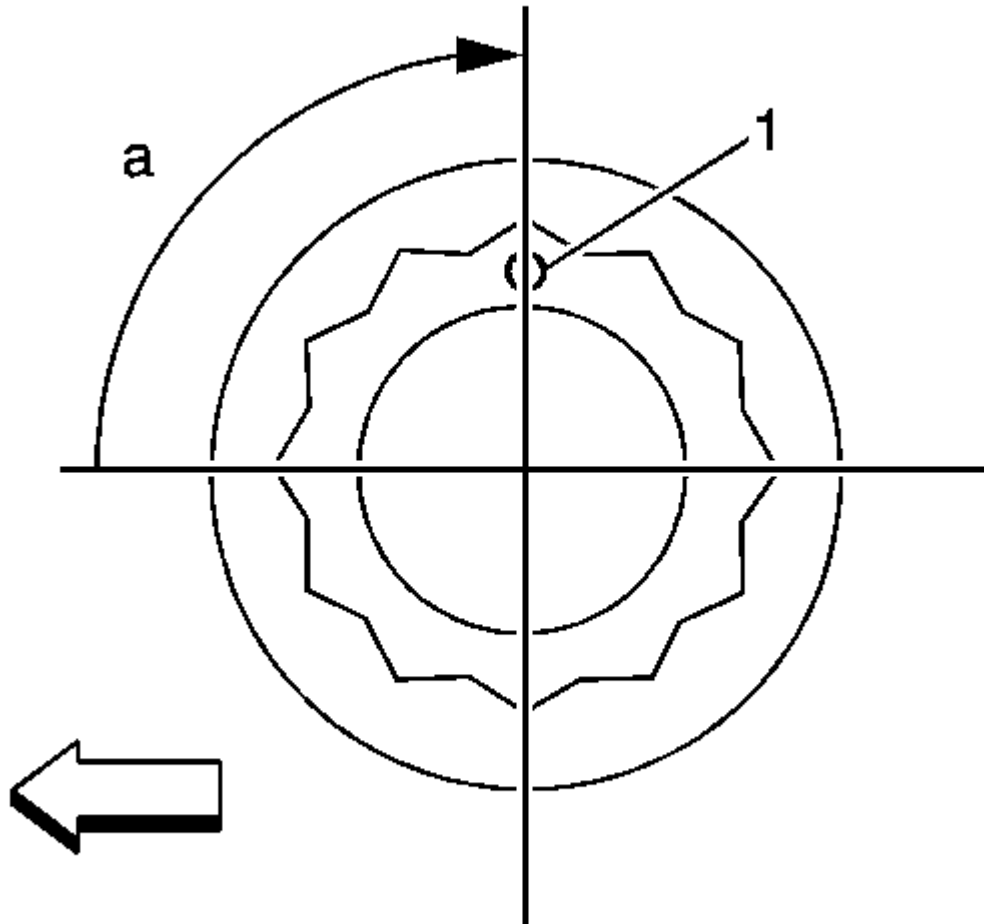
Marking Connecting Rod Cap Bolts For Final Tightening Step
